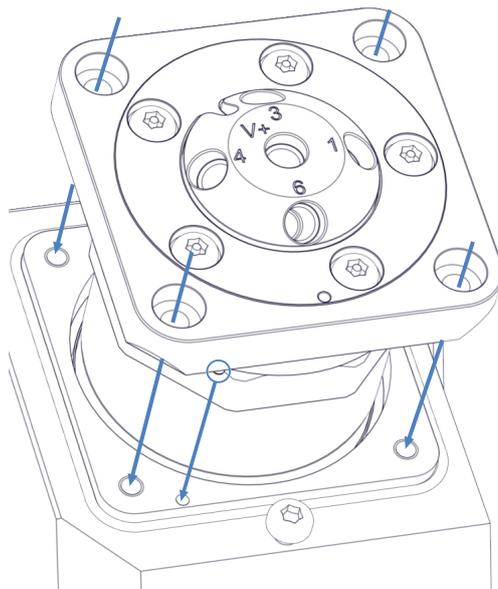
Aligning the injection valve (shown here: VF- and VH-autosampler)
